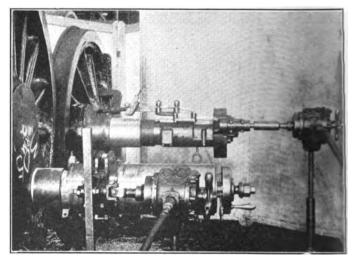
Portable Machines for Turning Mounted Crank Pins
